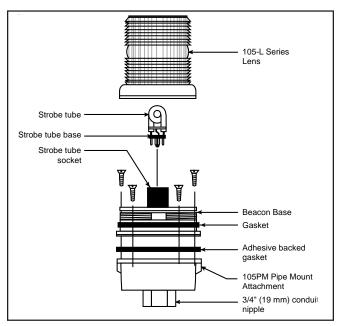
Securing the Beacon to the Mounting Attachment (Pipe Mount Attachment shown)
